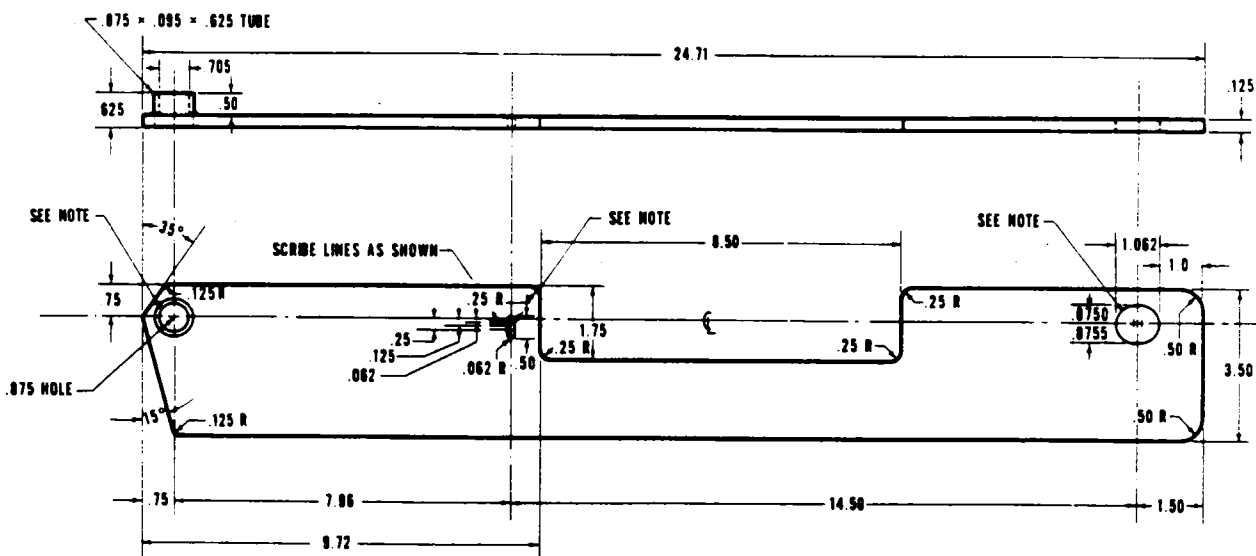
Fabricated Tool. Checking Nose Gear Link Travel
